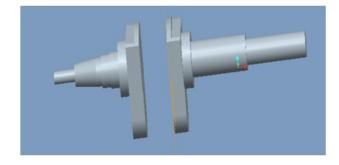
3d model of a crank shaft by using revolve and extrude option to its 2D sketch.
